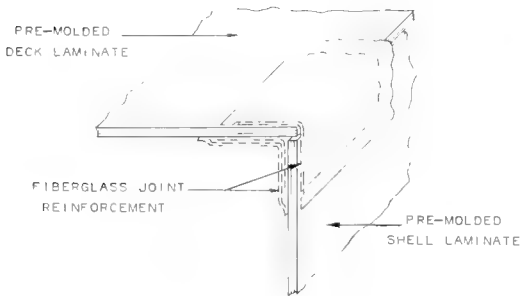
Deck Edge Connection - Simple Butt Joint
